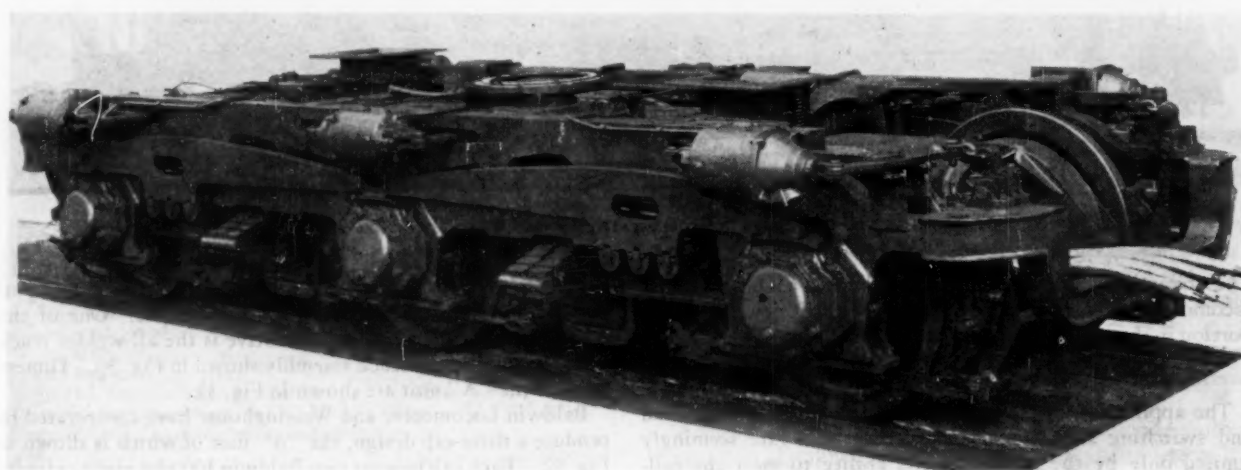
ALL-WELDED FABRICATED TRUCK FOR FAIRBANKS-MORSE DIESEL-ELECTRIC
